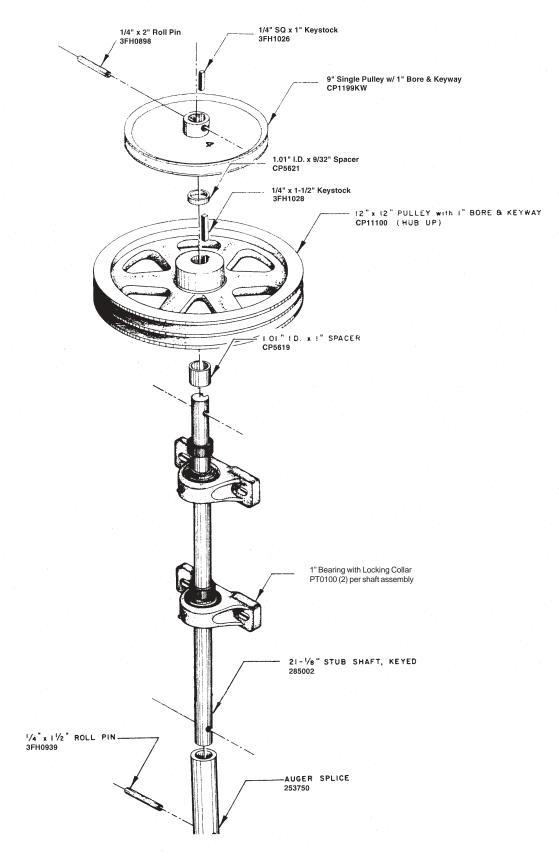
Stub Auger Assembly No. 4 (280004)
